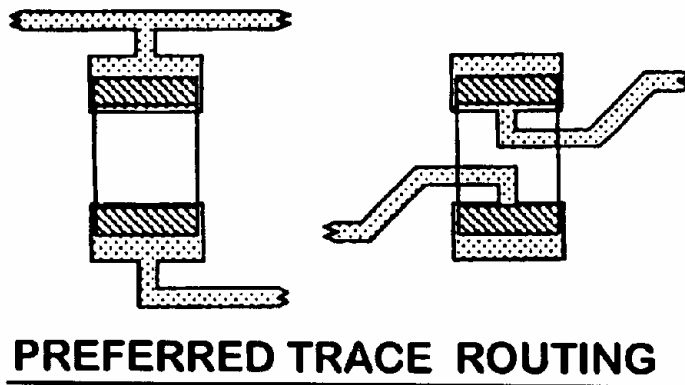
CONNECTING TRACES TO COMPONENT LANDS WHEN USING SOLDERMASK
